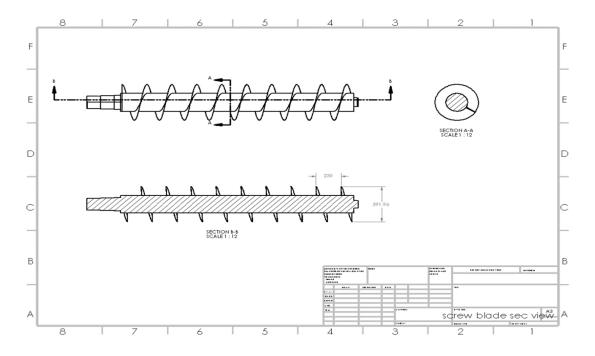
CROSS-SECTIONAL VIEW OF SPIRAL BLADE
